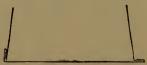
Section of Saucepan showing Pened-on Bottom.
